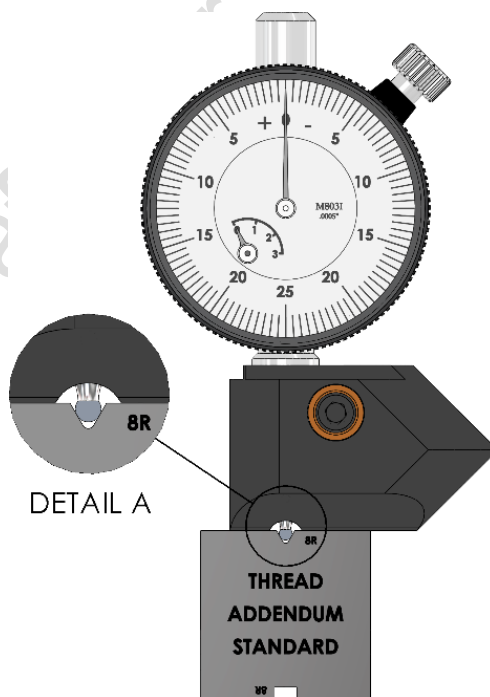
External Addendum Gauge on Setting Standards (8R and 10R Addendum Gauge on Block)
